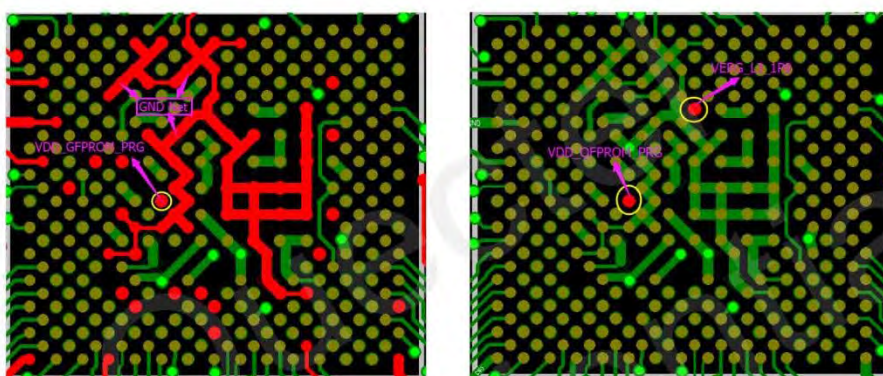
PCB Designs of BG96 R1.1 and R1.2
